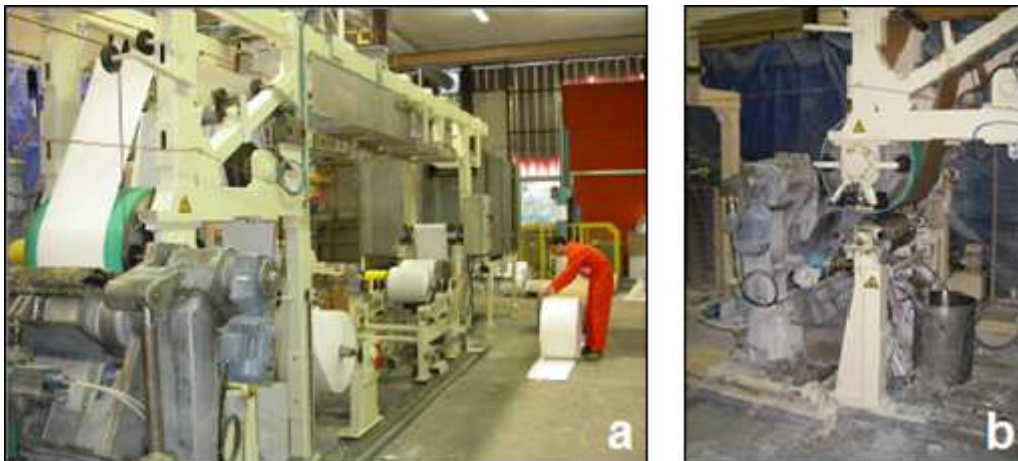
CTP “Pilot-Coating” machine (a) and view of the coating tank and tool (b)
